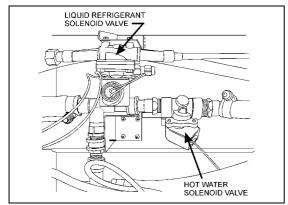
DRIVER'S EVAPORATOR LIQUID SOLENOID VALVE 22181
